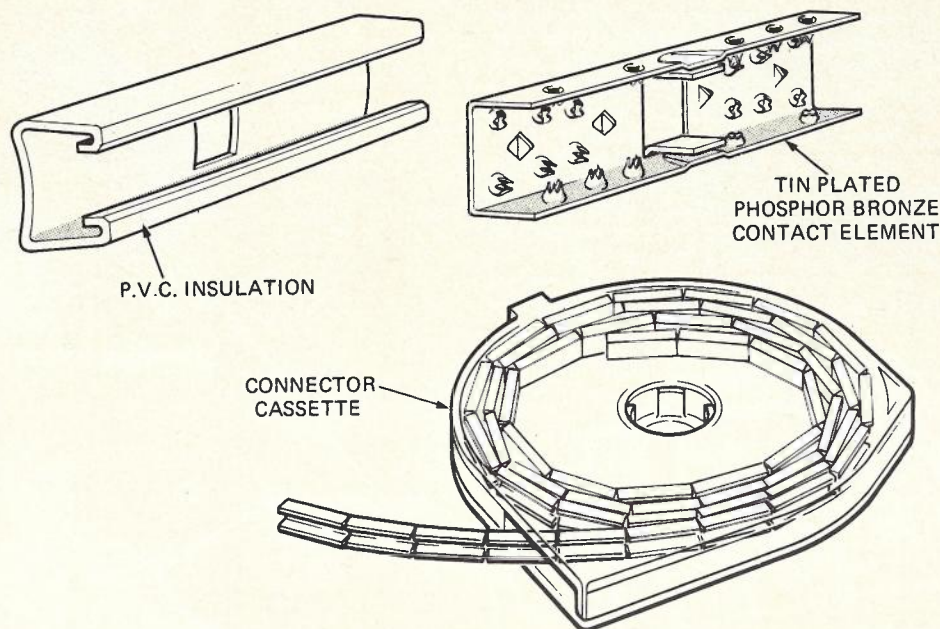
Connector Wire Jointing No. 4 (Plessey Telecrimp 24).
